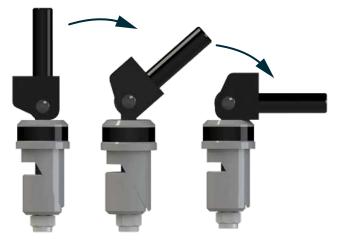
Slip Lifter - Closing the Quick Lock Pin assembly
